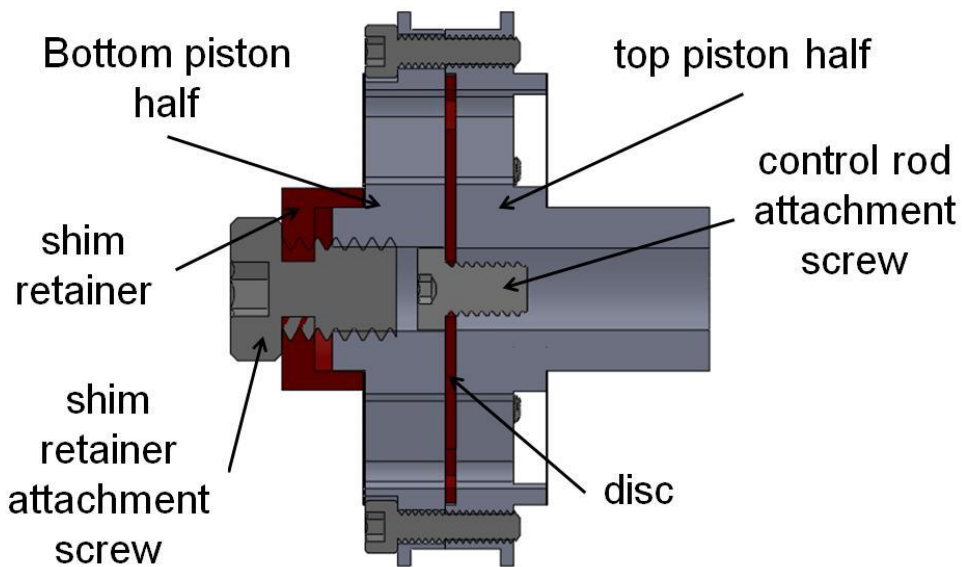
Section view of main piston assembly, excluding disc valve control rod
